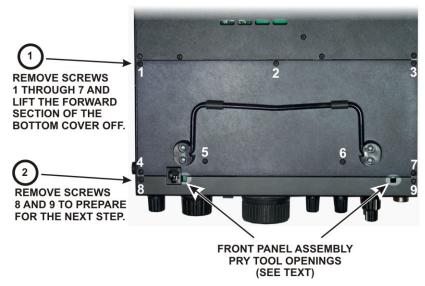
Removing Bottom Cover and Front Panel Assembly Screws.
